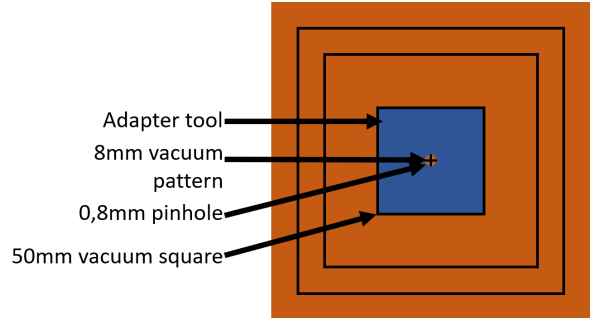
Chuck tool with the adapter on can grab any chip who can cover a 0.8 diameter circle.
